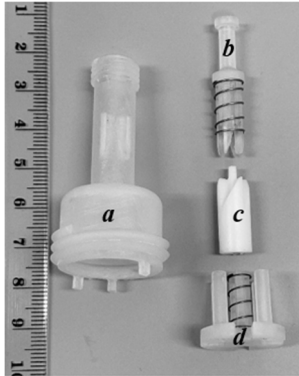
Components of rotational mechanism. (a) housing (b) plunger, (c) cam, (d) revolving chamber.
